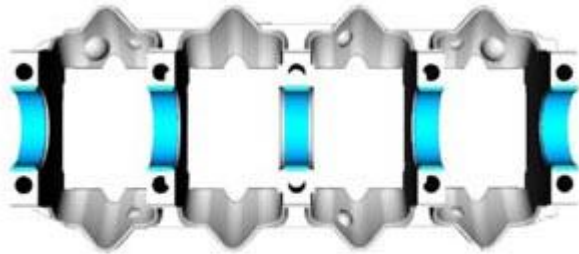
Identifying Main Bearing Beam Bolts In Sequence
